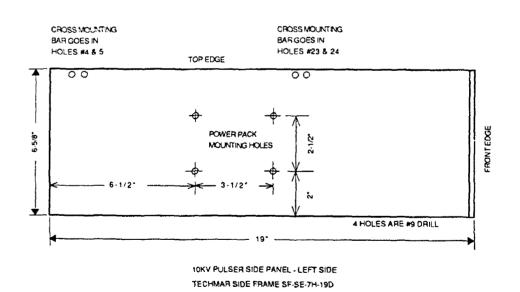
10-kV LEFT SIDE RAIL DRILL GUIDE
